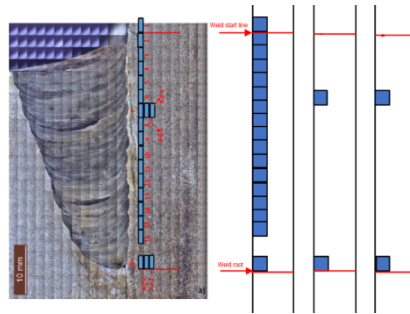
Schematic presentation of the SANS measurement positions in specimen Weld 3 a) top view of the measurement windows, overlaid against the weld macrographs and b) side view of the measurement windows (as in front of the SANS beamline).
